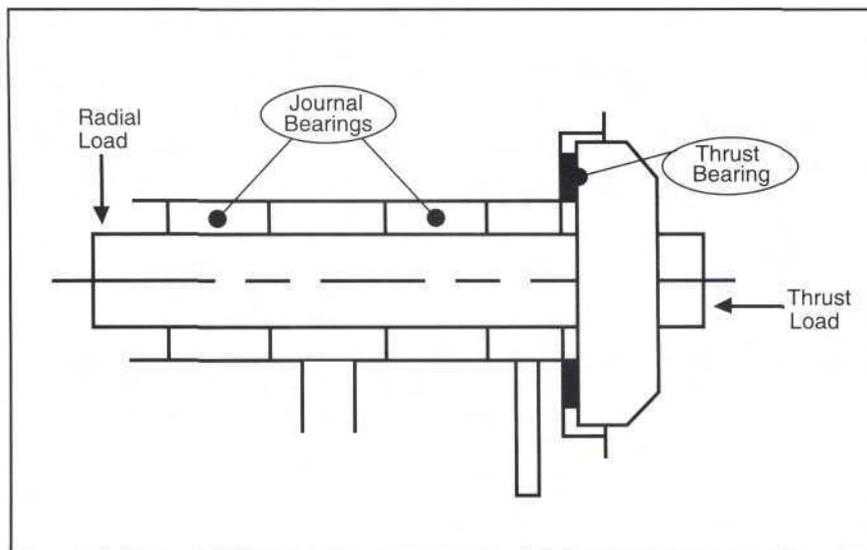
Machine Member with Journal Bearings and a Thrust Bearing.
